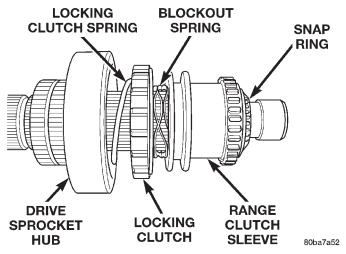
Range Clutch Sleeve, Blockout Spring, Locking Clutch and Spring
